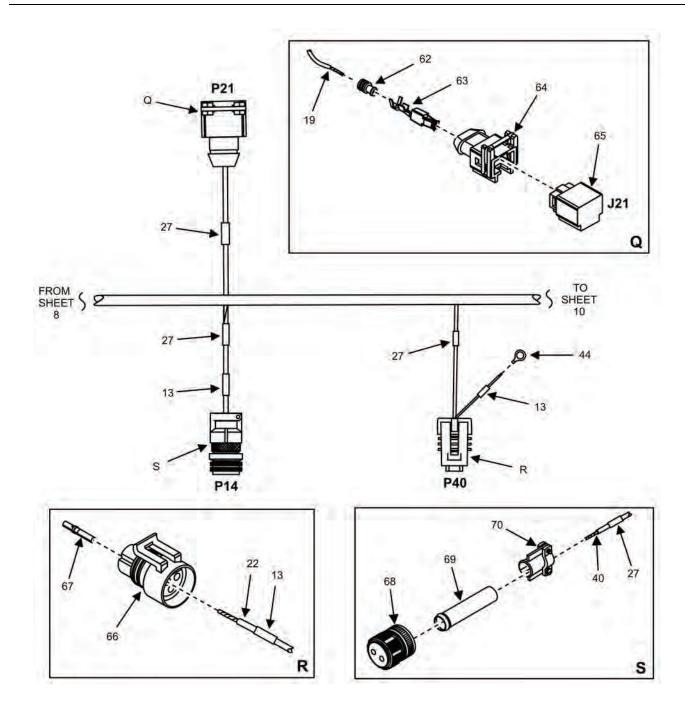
Engine Wiring Harness (Sheet 9 of 15).
